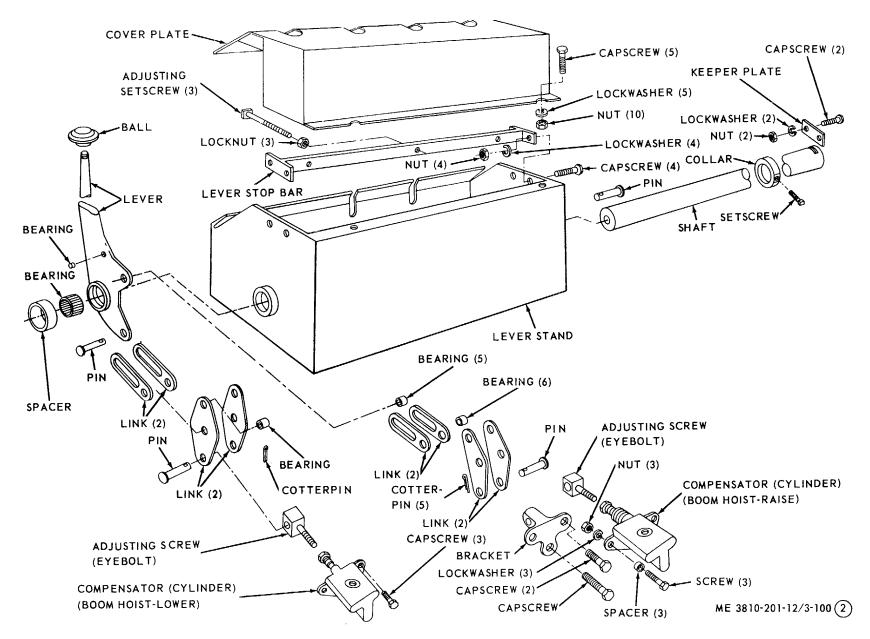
Lever stand showing compensator, lever, pedal, and linkage removal and adjustment points (sheet 2 of 2).
